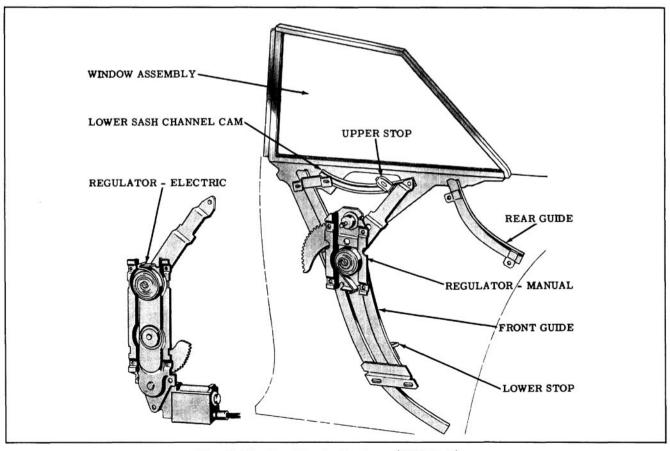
Rear Quarter Hardware (3947 Style)
